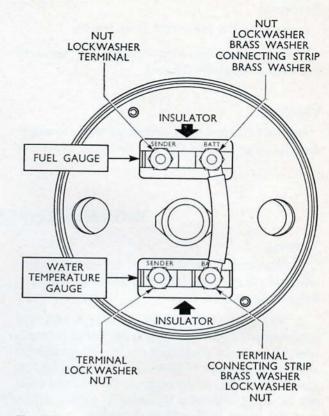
Rear view of combined instrument assembly, showing assembly sequence of gauge attaching parts
